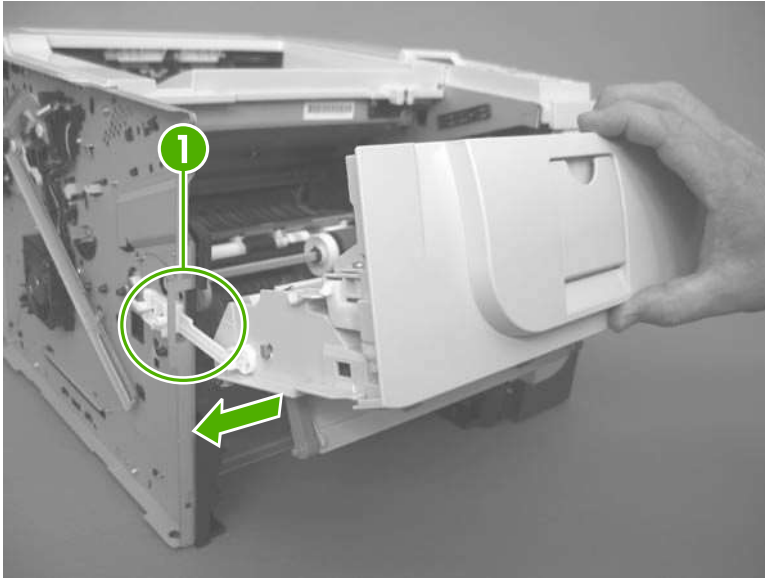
Remove the cartridge-door assembly (1 of 3)
